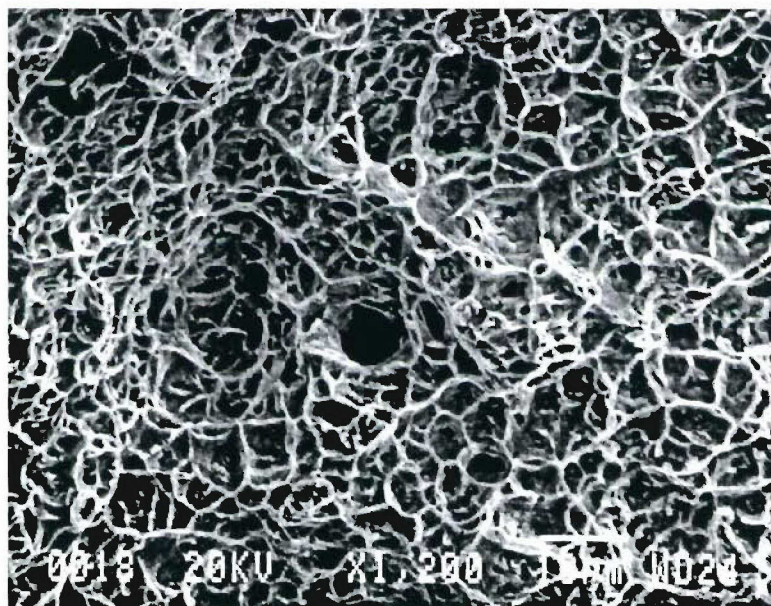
Fine-scale void sheet on the ductile fracture surface of weld INCONEL-625 superalloy.
